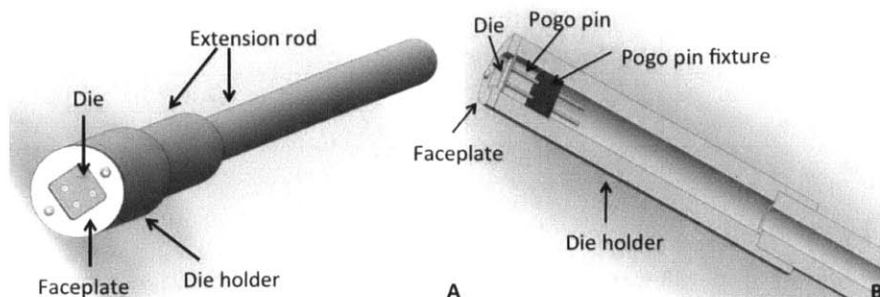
(A) Schematic of the MEMS Langmuir probe test fixture; (B) Cross-section of the MEMS probe test fixture.
